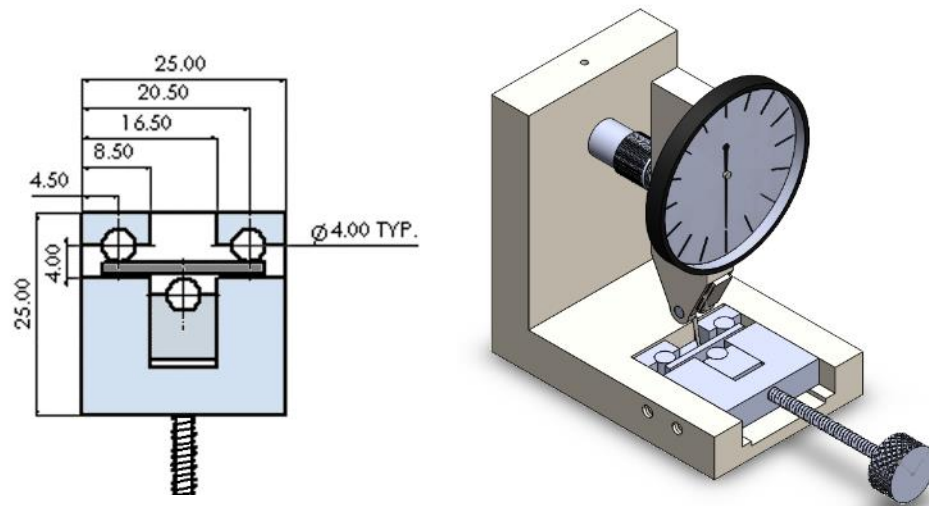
a) Drawing and dimensions of the three-point bender device assembly showing dimensions and loaded sample. b) Setup for measuring the sample deflection using a test dial indicator.
